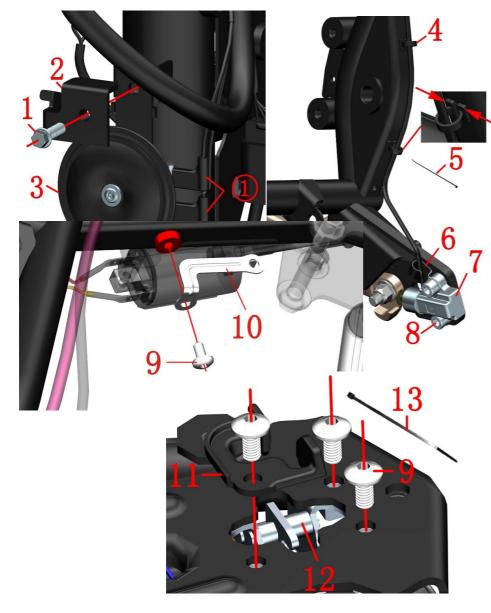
FRAME&ELECTRONIC PARTS COMPONENT		Electrical device component-2	СНК	0
